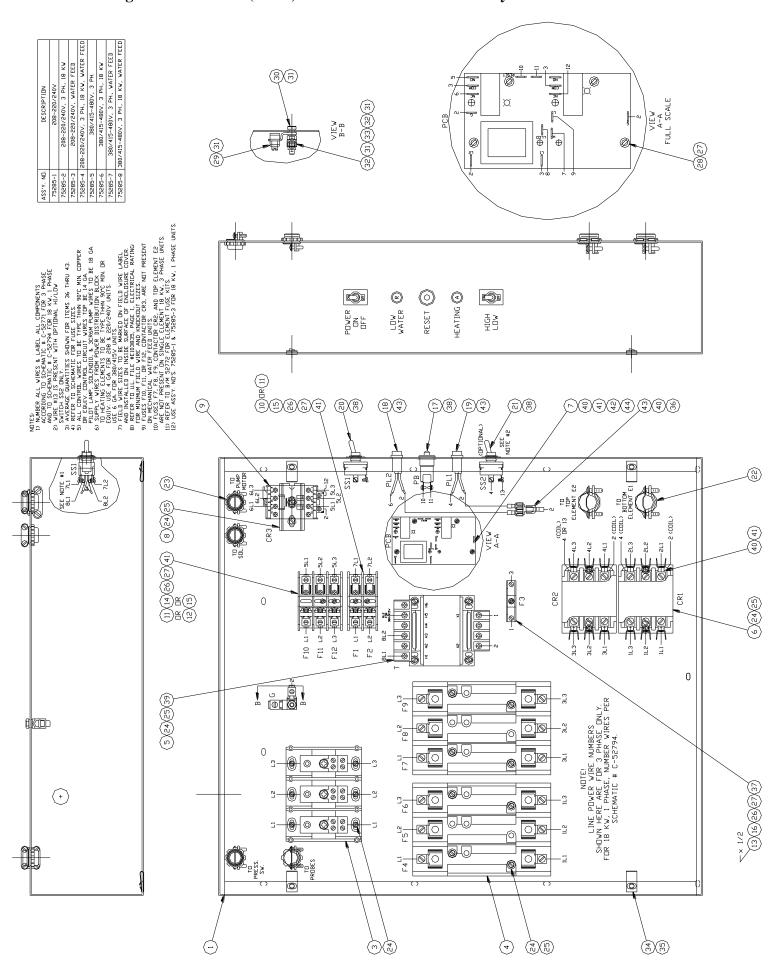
73493 (rev C) Water Pump Assembly Kit RHPG 18-36 KW
